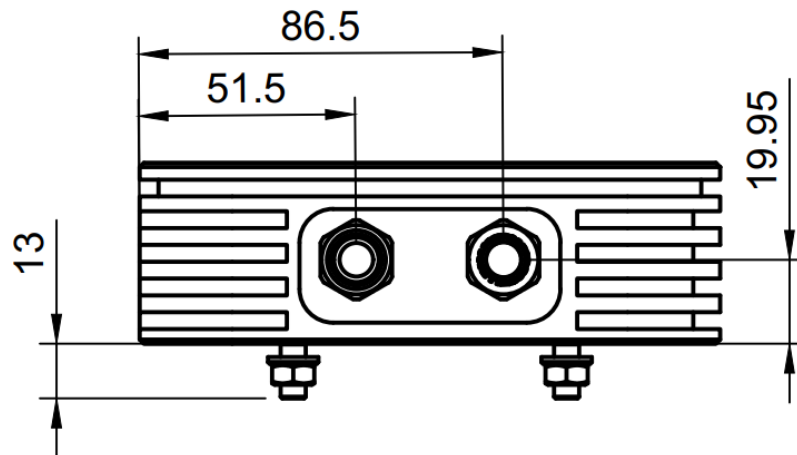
KY-LOC 1D.02.01 Mechanical Drawing (Bottom View)
